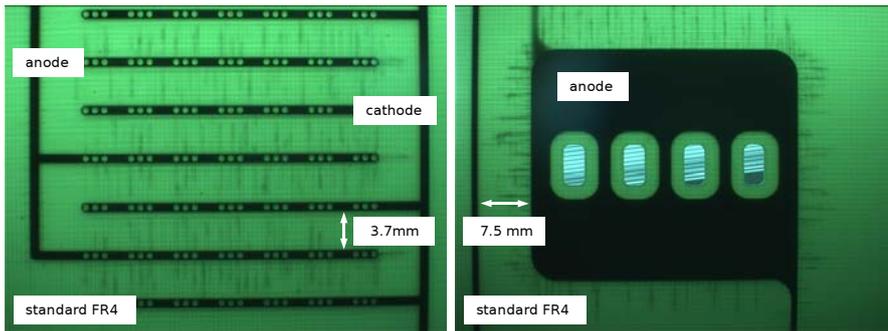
Standard FR4 PCB after 730h CAF testing at 1500V, 85°C and 85% rH
